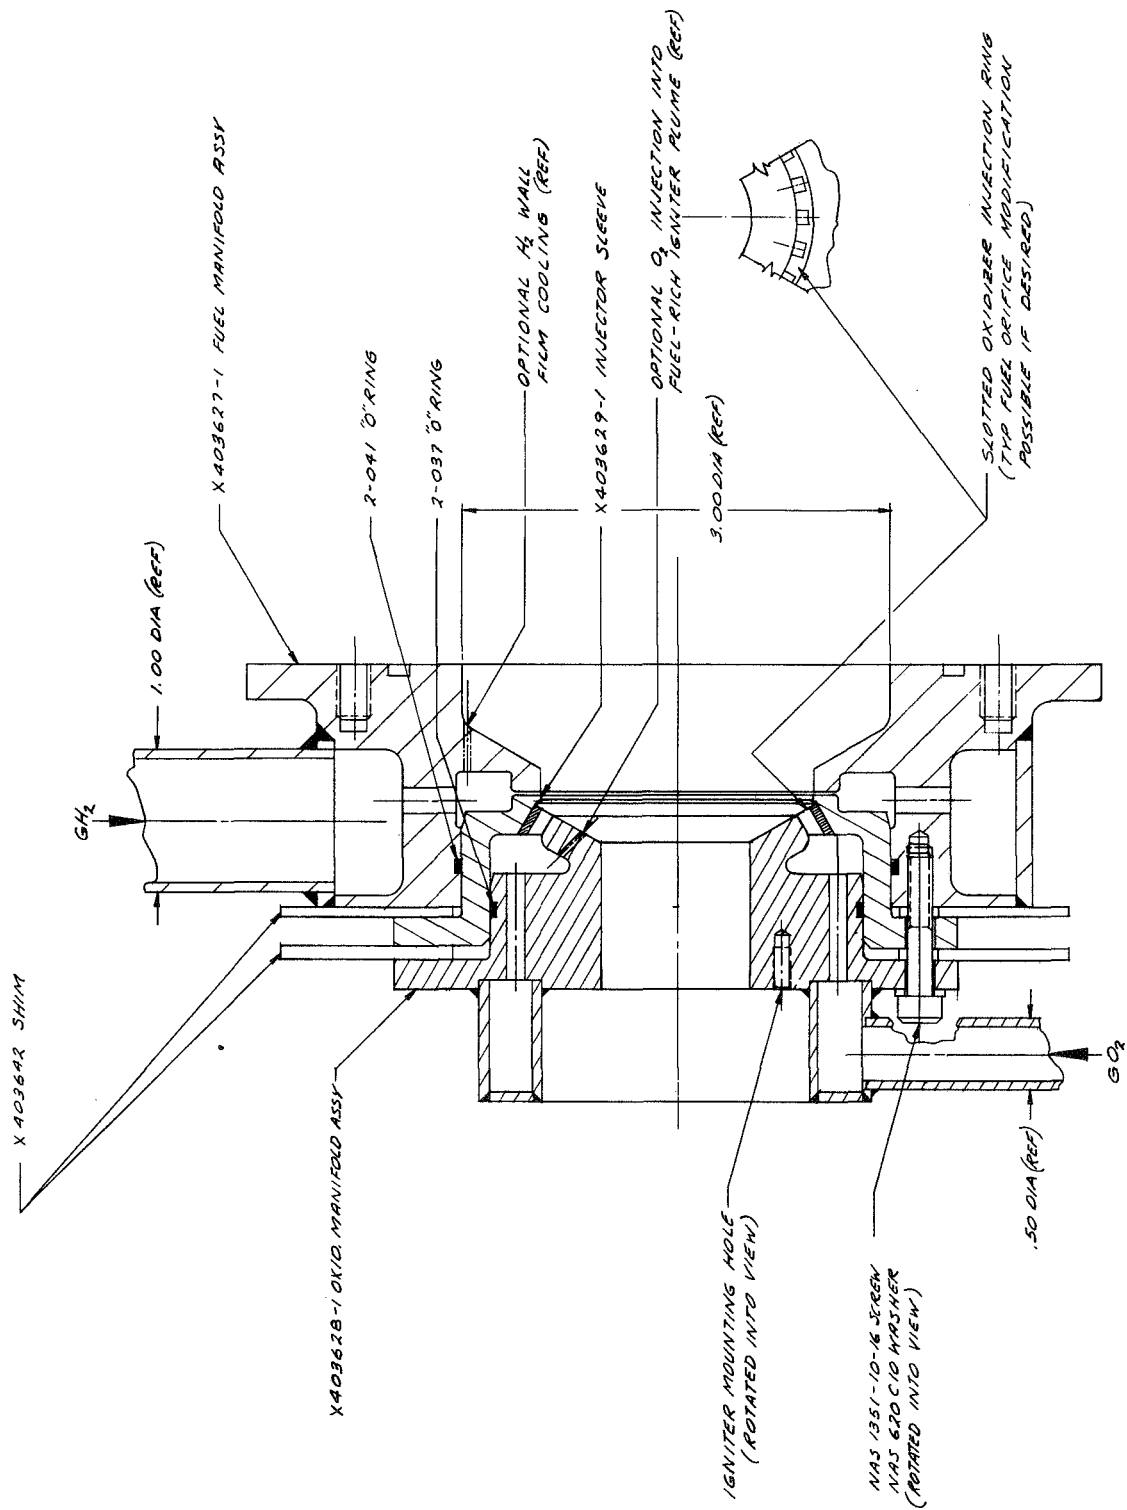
Main Injector Assembly—Low Chamber Pressure Thruster
